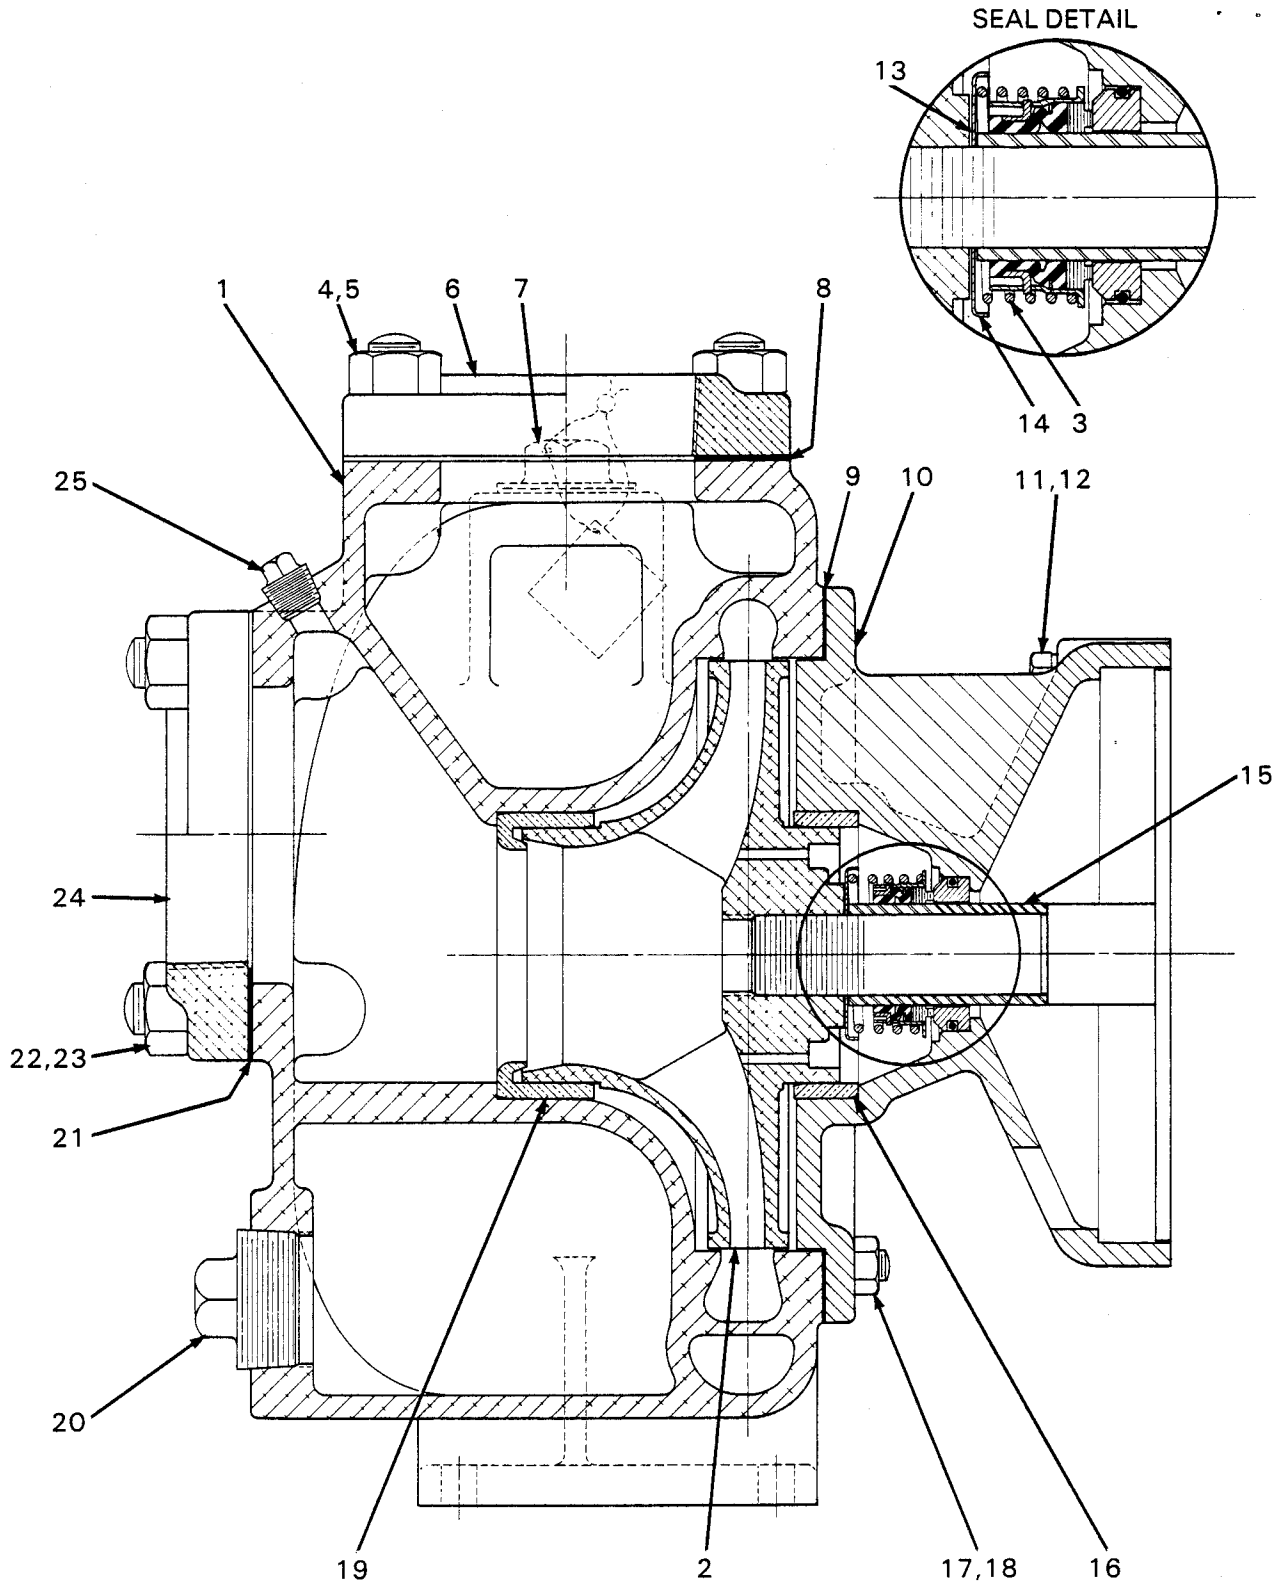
Pump End Assembly Model 03H1-K301P S/G
